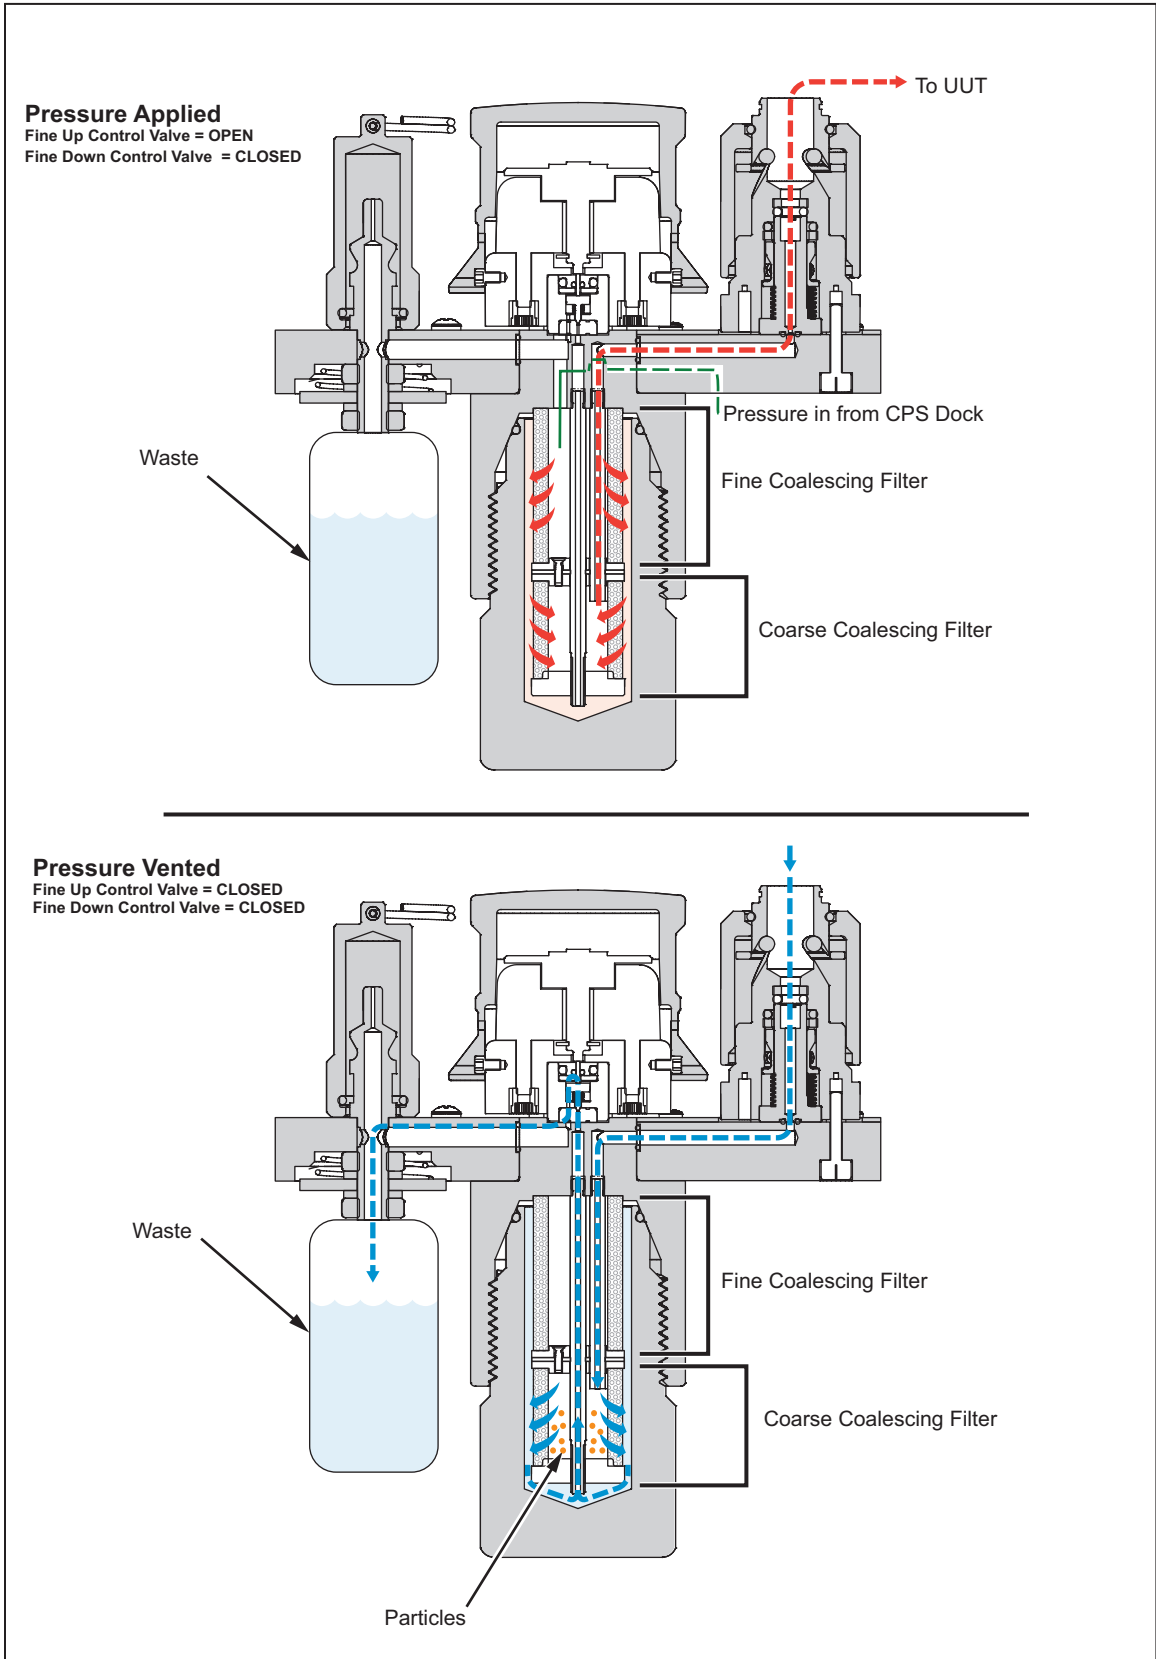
CPS Pressure Routing (Cross-Section View)
